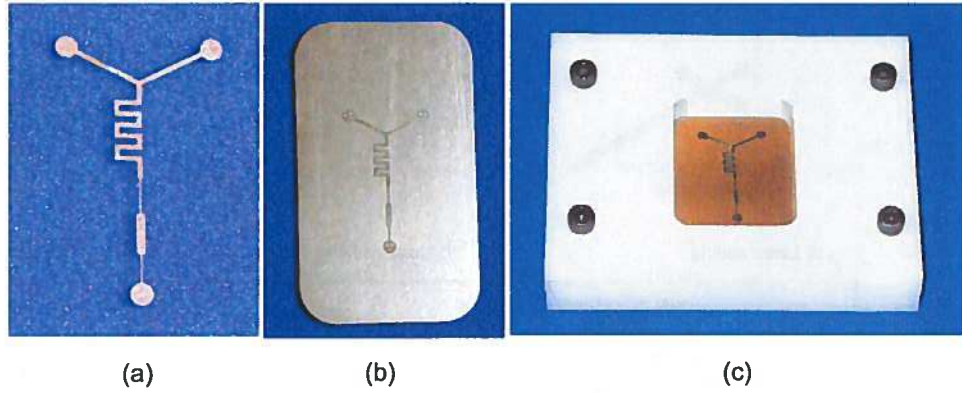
Microfabrication of a metallic micro-mold master using the LCWM process. (a) Laser cut positive relief of desired microfluidic pattern, (b) relief pattern welded onto the substrate material to form the master mold, and (c) insertion of the master into a mold fixture for casting the part in PDMS.
